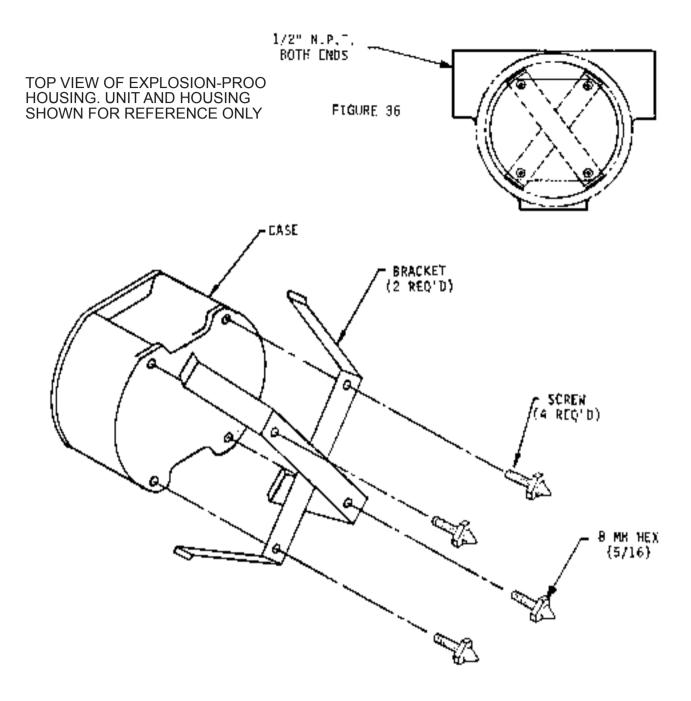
Spring Retainer for Explosion-Proof Housing
